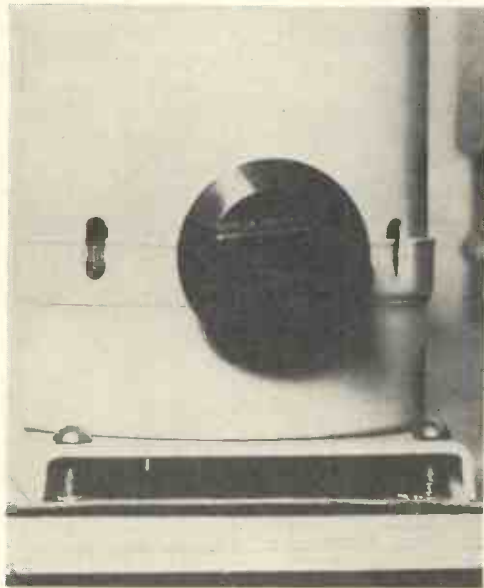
WHEN COMPONENTS ARE MOUNTED ON A METAL SCREENED BASE TAKE CARE TO REMOVE THE BURRS FROM THE UNDERNEATH OF THE PLATE BEFORE FIXING THE COMPONENTS, OR THEY WILL NOT SEAT DOWN PROPERLY.
